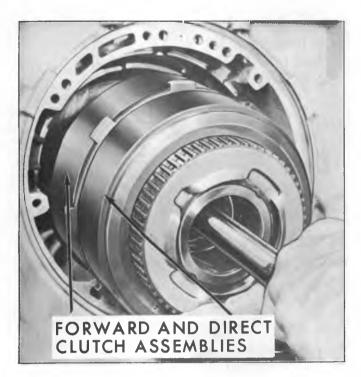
M--Removing Direct and Forward Clutch Assemblies
